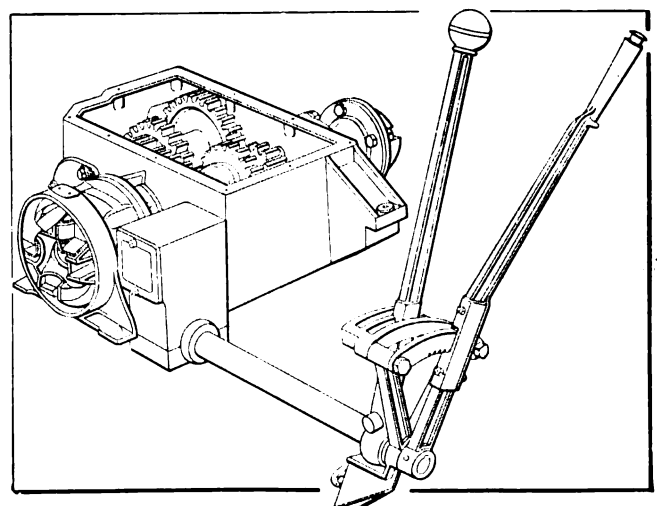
General appearance of the transmission and levers and the ball-socket joint in which the front end of the propeller tube rests
